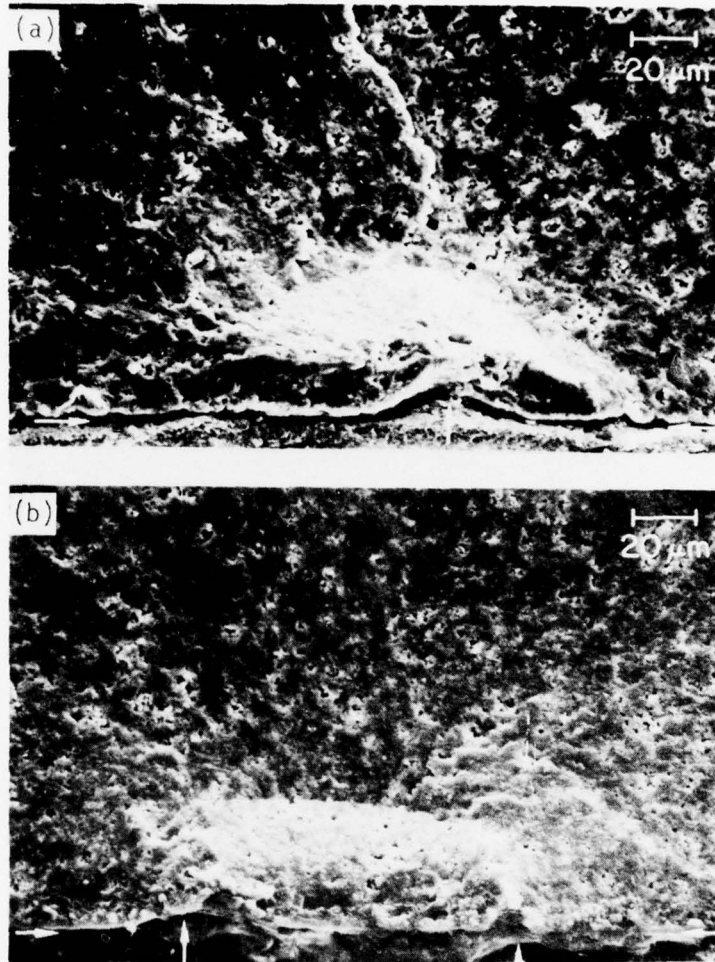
Examples of machining flaw failure origins in reaction sintered  $\text{Si}_3\text{N}_4$ . Note the somewhat irregular and out of plane character to the flaw shown in (a) from grinding parallel with the tensile axis. Note the deeper grinding gouge (vertical arrow) associated with this machining flaw. (b) shows a more elongated flaw from machining parallel with the tensile axis. The longer character of this flaw for machining parallel with the tensile axis is apparently due to its extension between two deeper grinding gouges (vertical arrows). Note in both of the above photos that the horizontal arrows mark the demarcation between the fractures surface and the tensile surface.
